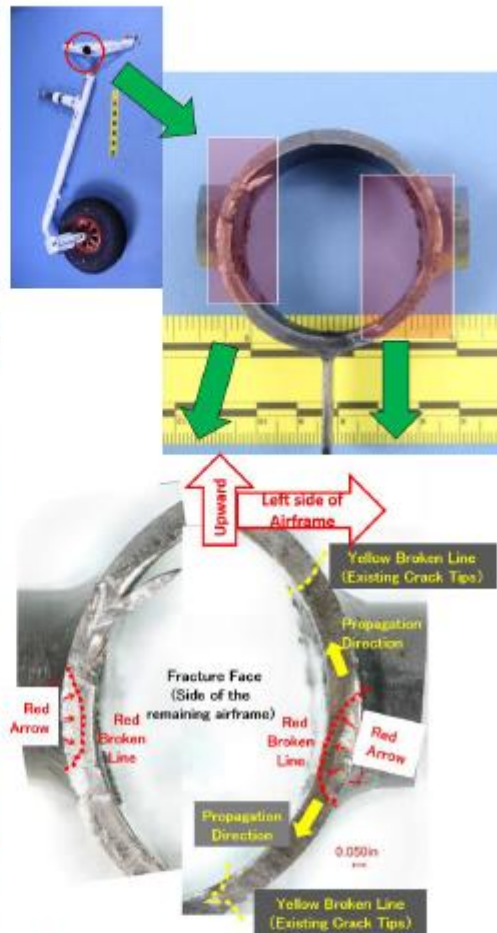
Fracture Surface Analysis of the nose landing gear strut tube
